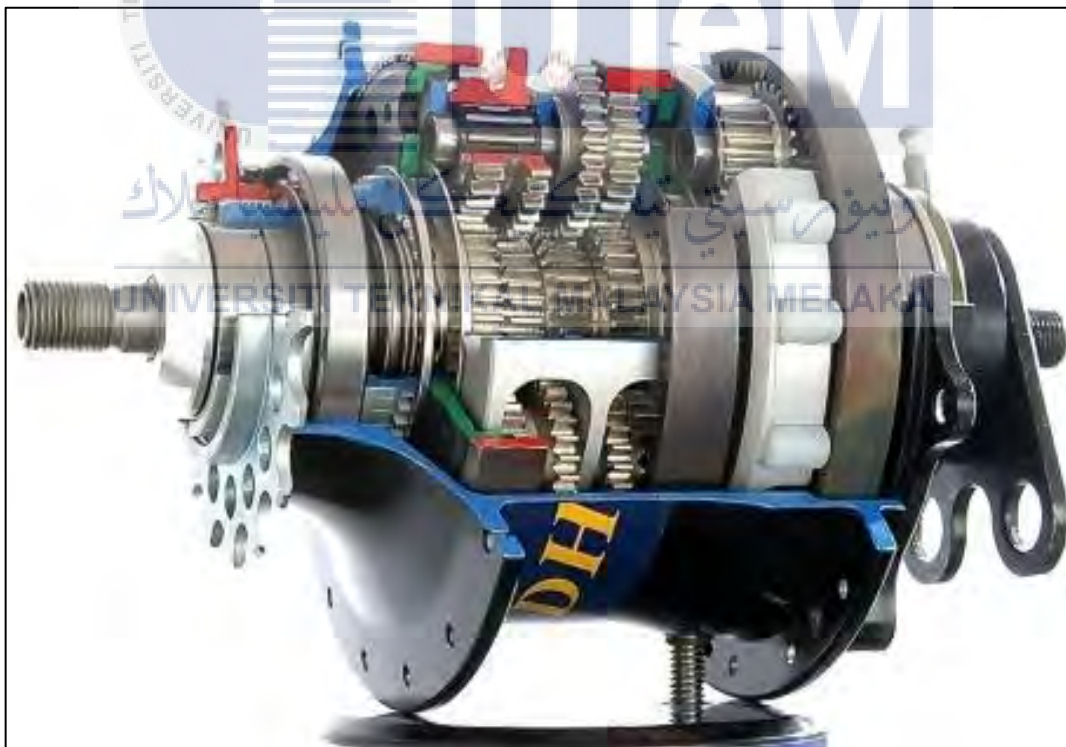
Hub Gearing (<http://harry.biketravellers.com>)
